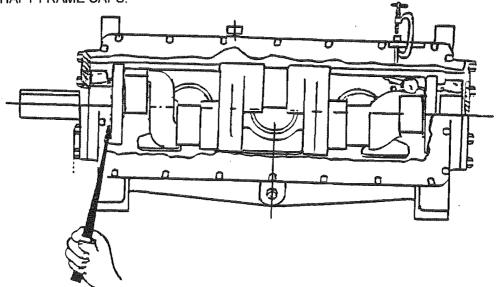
CRANKSHAFT END PLAY ADJUSTMENT
